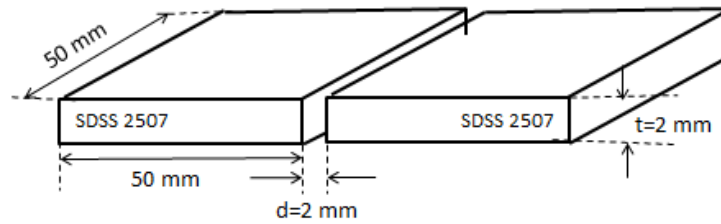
Schematic figure of joint design for welding of superduplex
